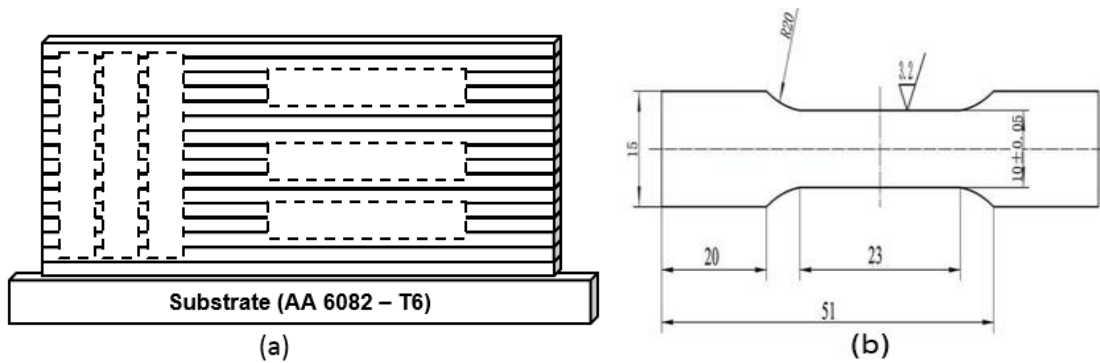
(a) The sectioned directions of tensile specimens (b) tensile specimen dimension
